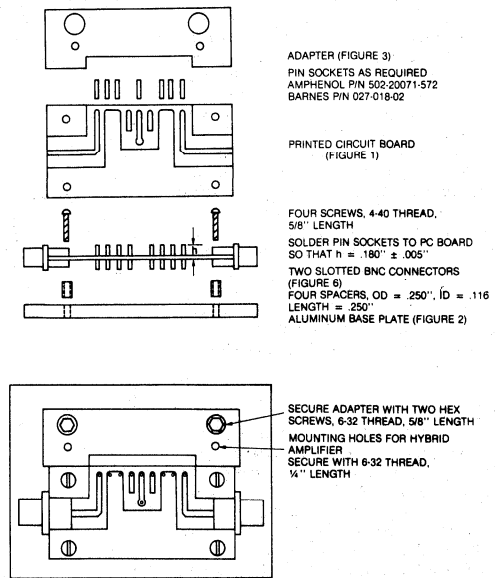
Test Fixture Assembly for Hybrid Amplifiers in Hermetic Package (Case 826-01)
